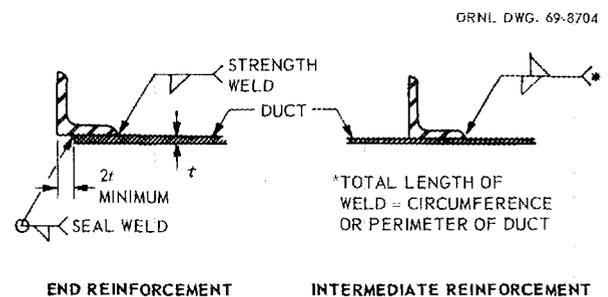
Recommended welding for attaching reinforcements to ducts.
